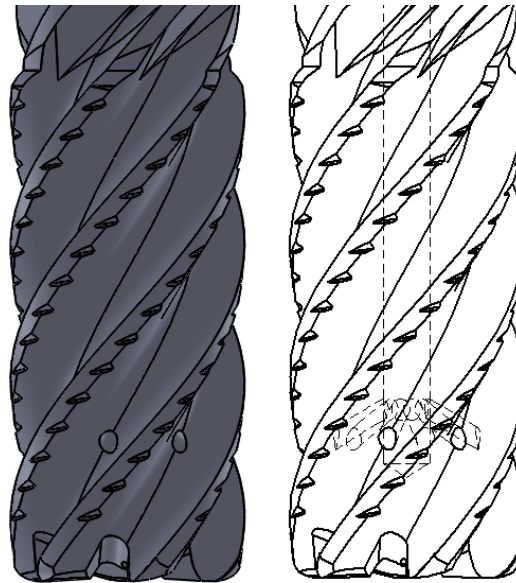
Sandvik CoroMill Plura solid carbide end mill geometry (*left*) with internal coolant channels illustrated (*right*).
